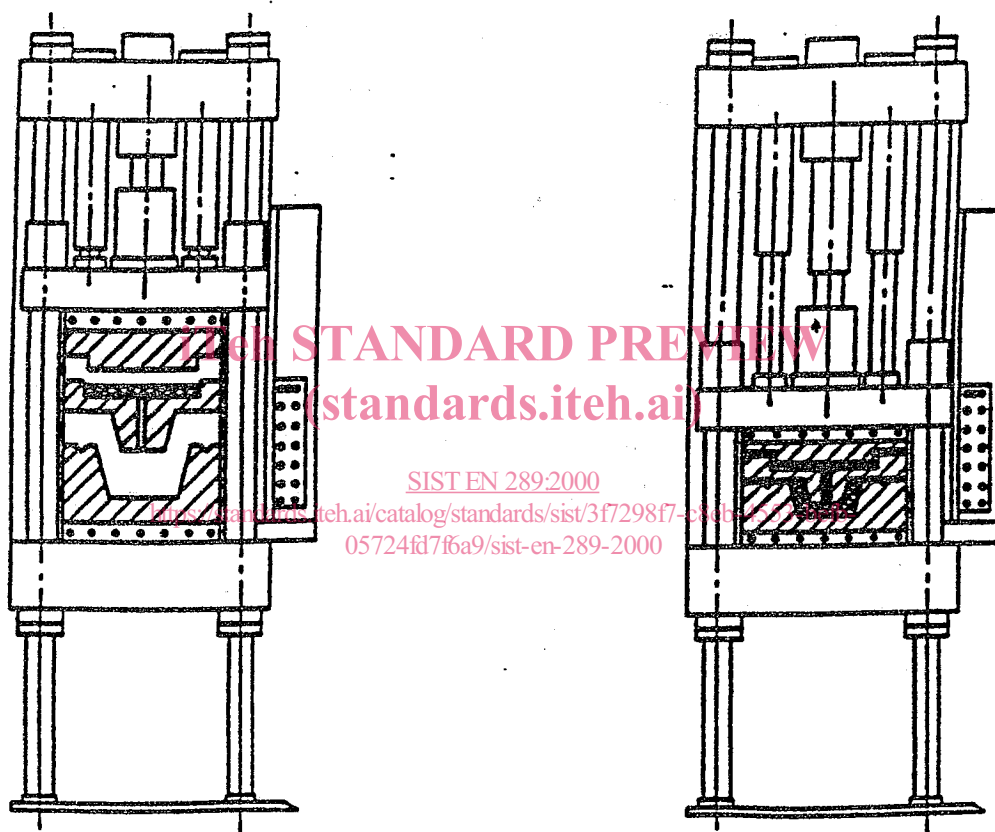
Press for transfer moulding shown with moulding material in transfer cavity
